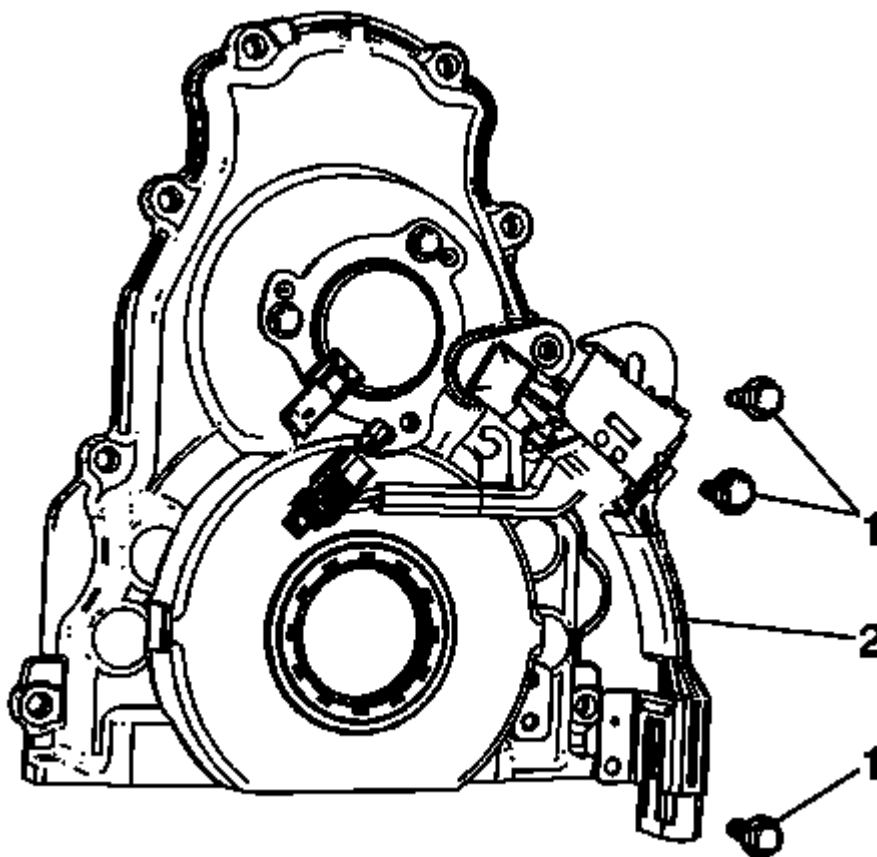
CMP Sensor, CMP Sensor Wire Harness And Bolts
